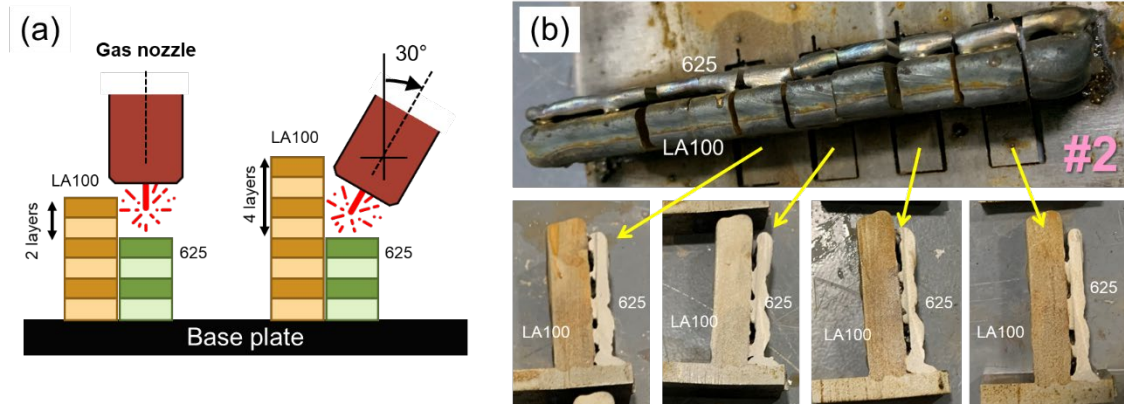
(a) the print configuration of the trial wall #2 with 4-layers offset combining with 30-degree inclined torch, and (b) pictures showing the wall and cross-sections.
